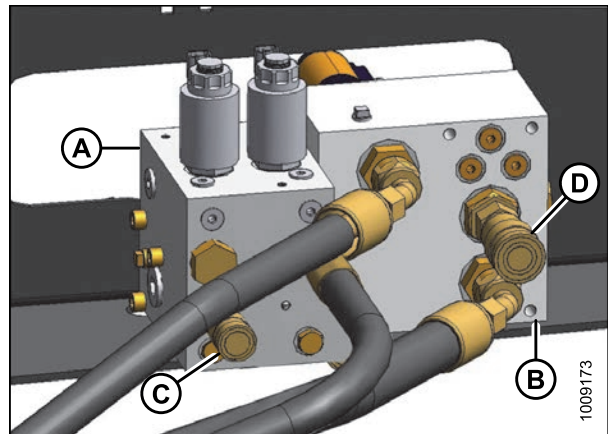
Valve Blocks without Reverser Valve Configured for Auger Header
